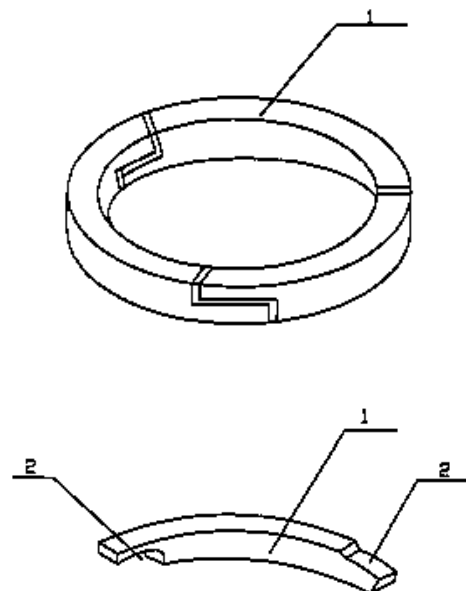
Magnetic piston ring: 1 – section; 2 – joint
